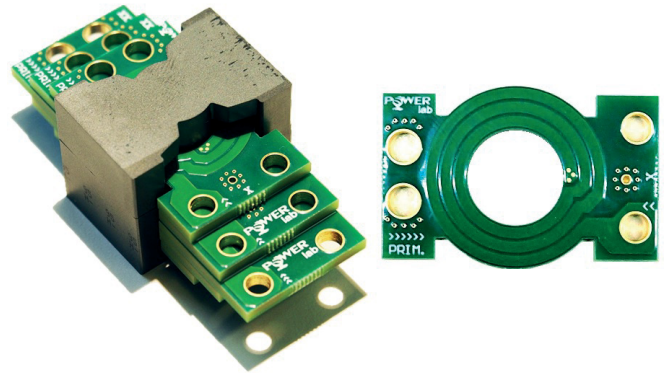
Stacked PCB layers of high-frequency planar transformer prototype (left) and a single stack (right)
